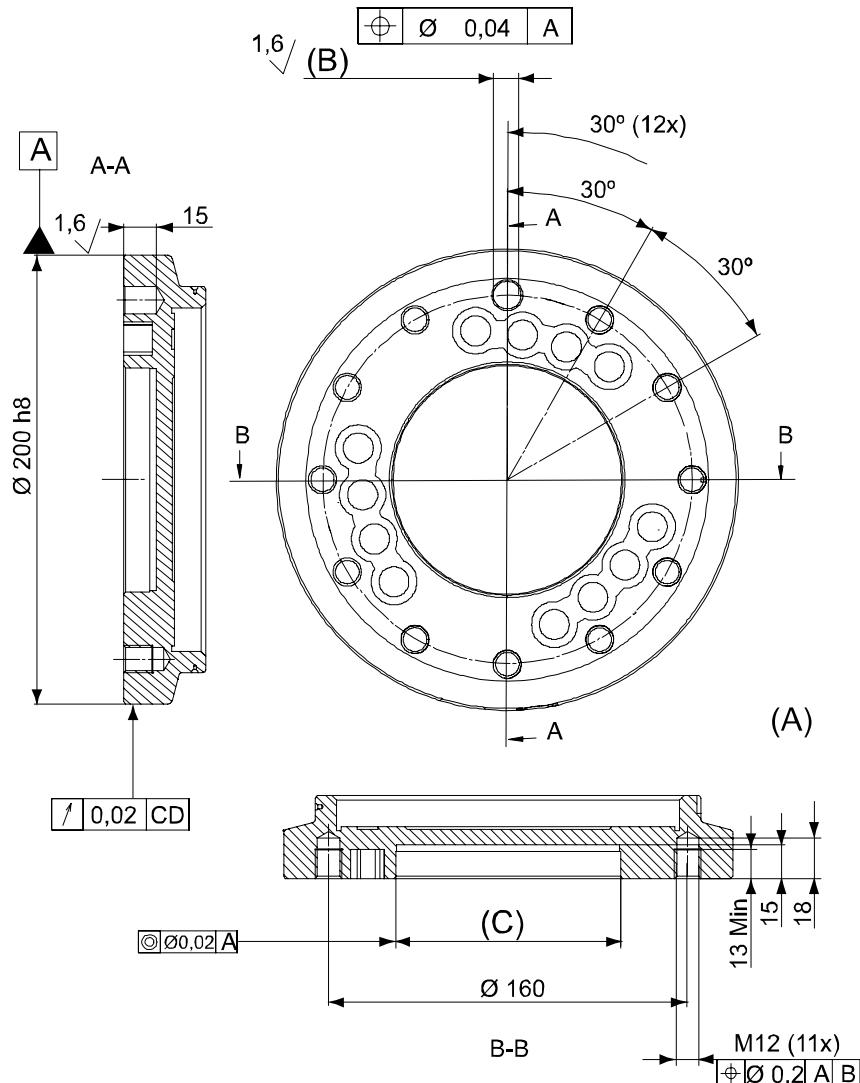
Robot tool flange ISO/DIS 9409-1:2002 (dimensions in mm).
